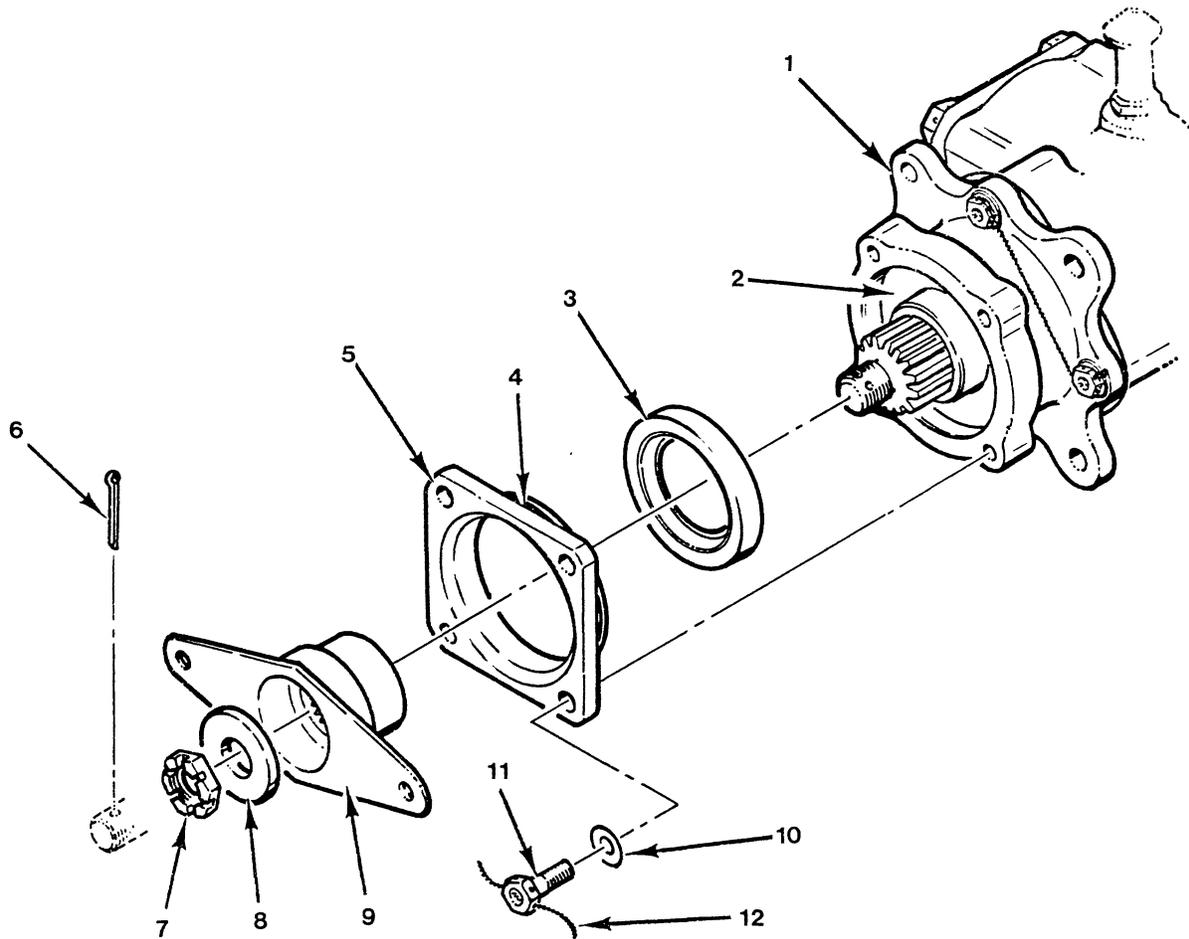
A TAIL ROTOR GEARBOX INPUT SHAFT SEAL REPLACEMENT
